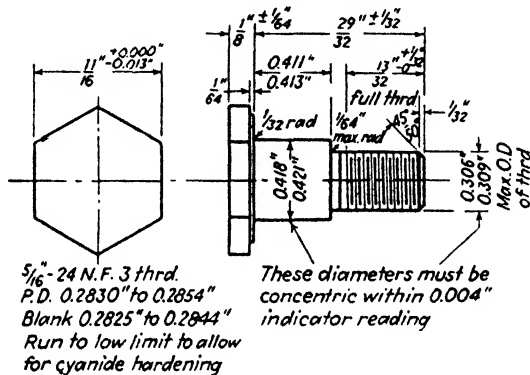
This cold-headed shoulder bolt costs 50 per cent less than if made on a screw machine. It is made of S.A.E. 1020 steel.
